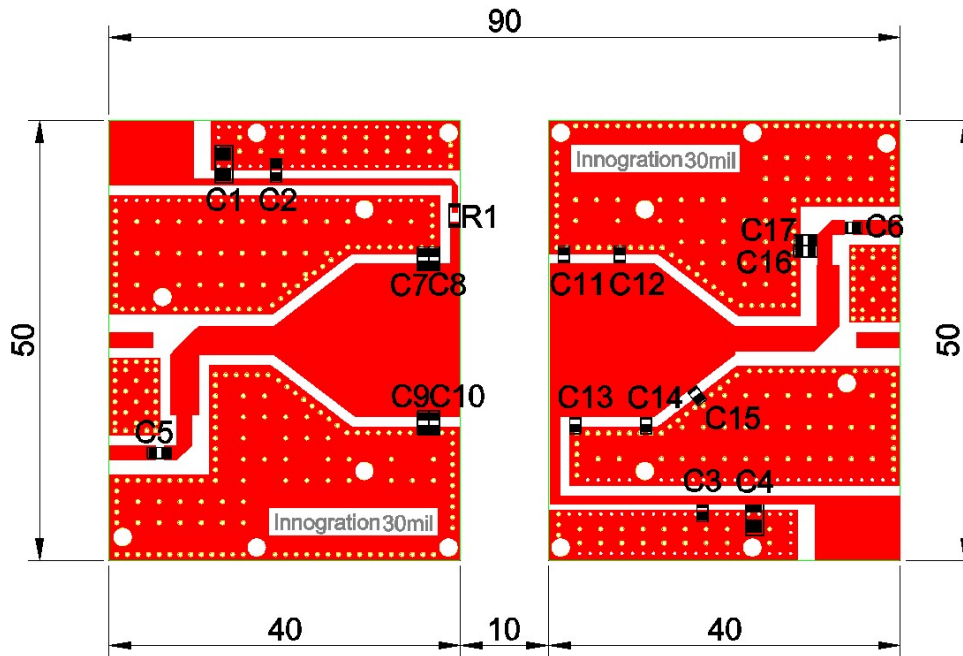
Test Circuit Component Layout (1475-1525MHz)
